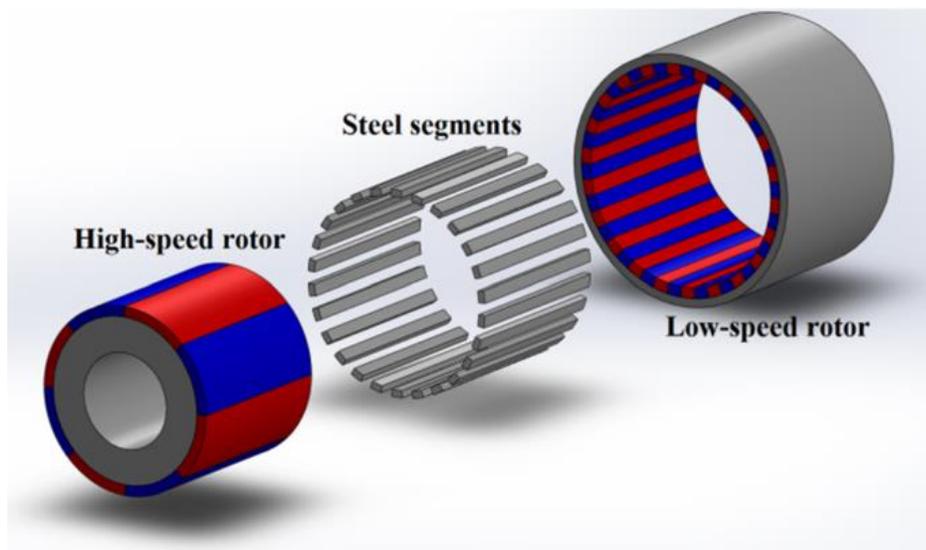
Exploded view of magnetic gear assembly (source: [Springer Link](#))
